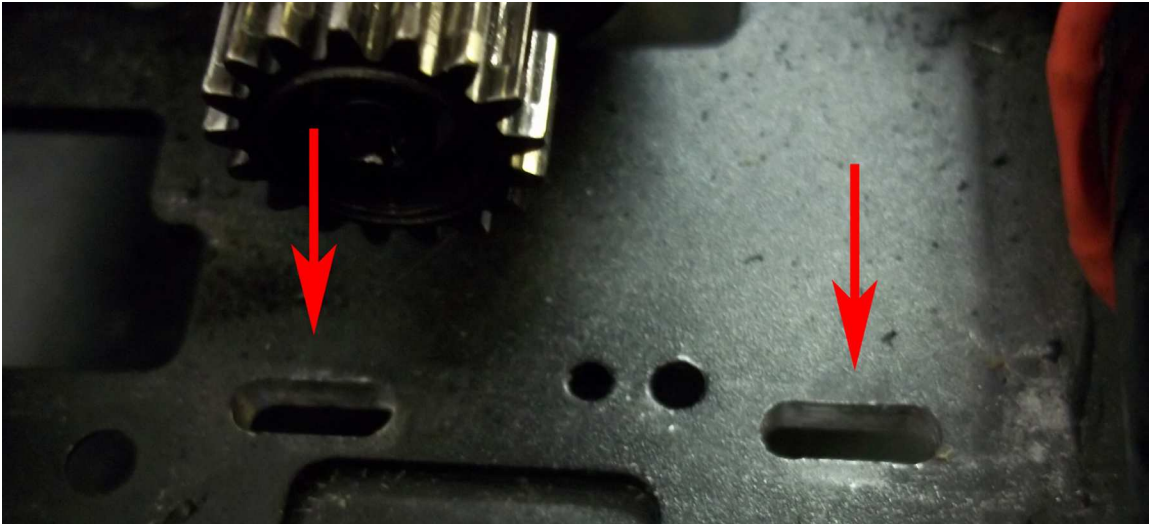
Two channel holes on the car chassis for mounting the electric motor.
